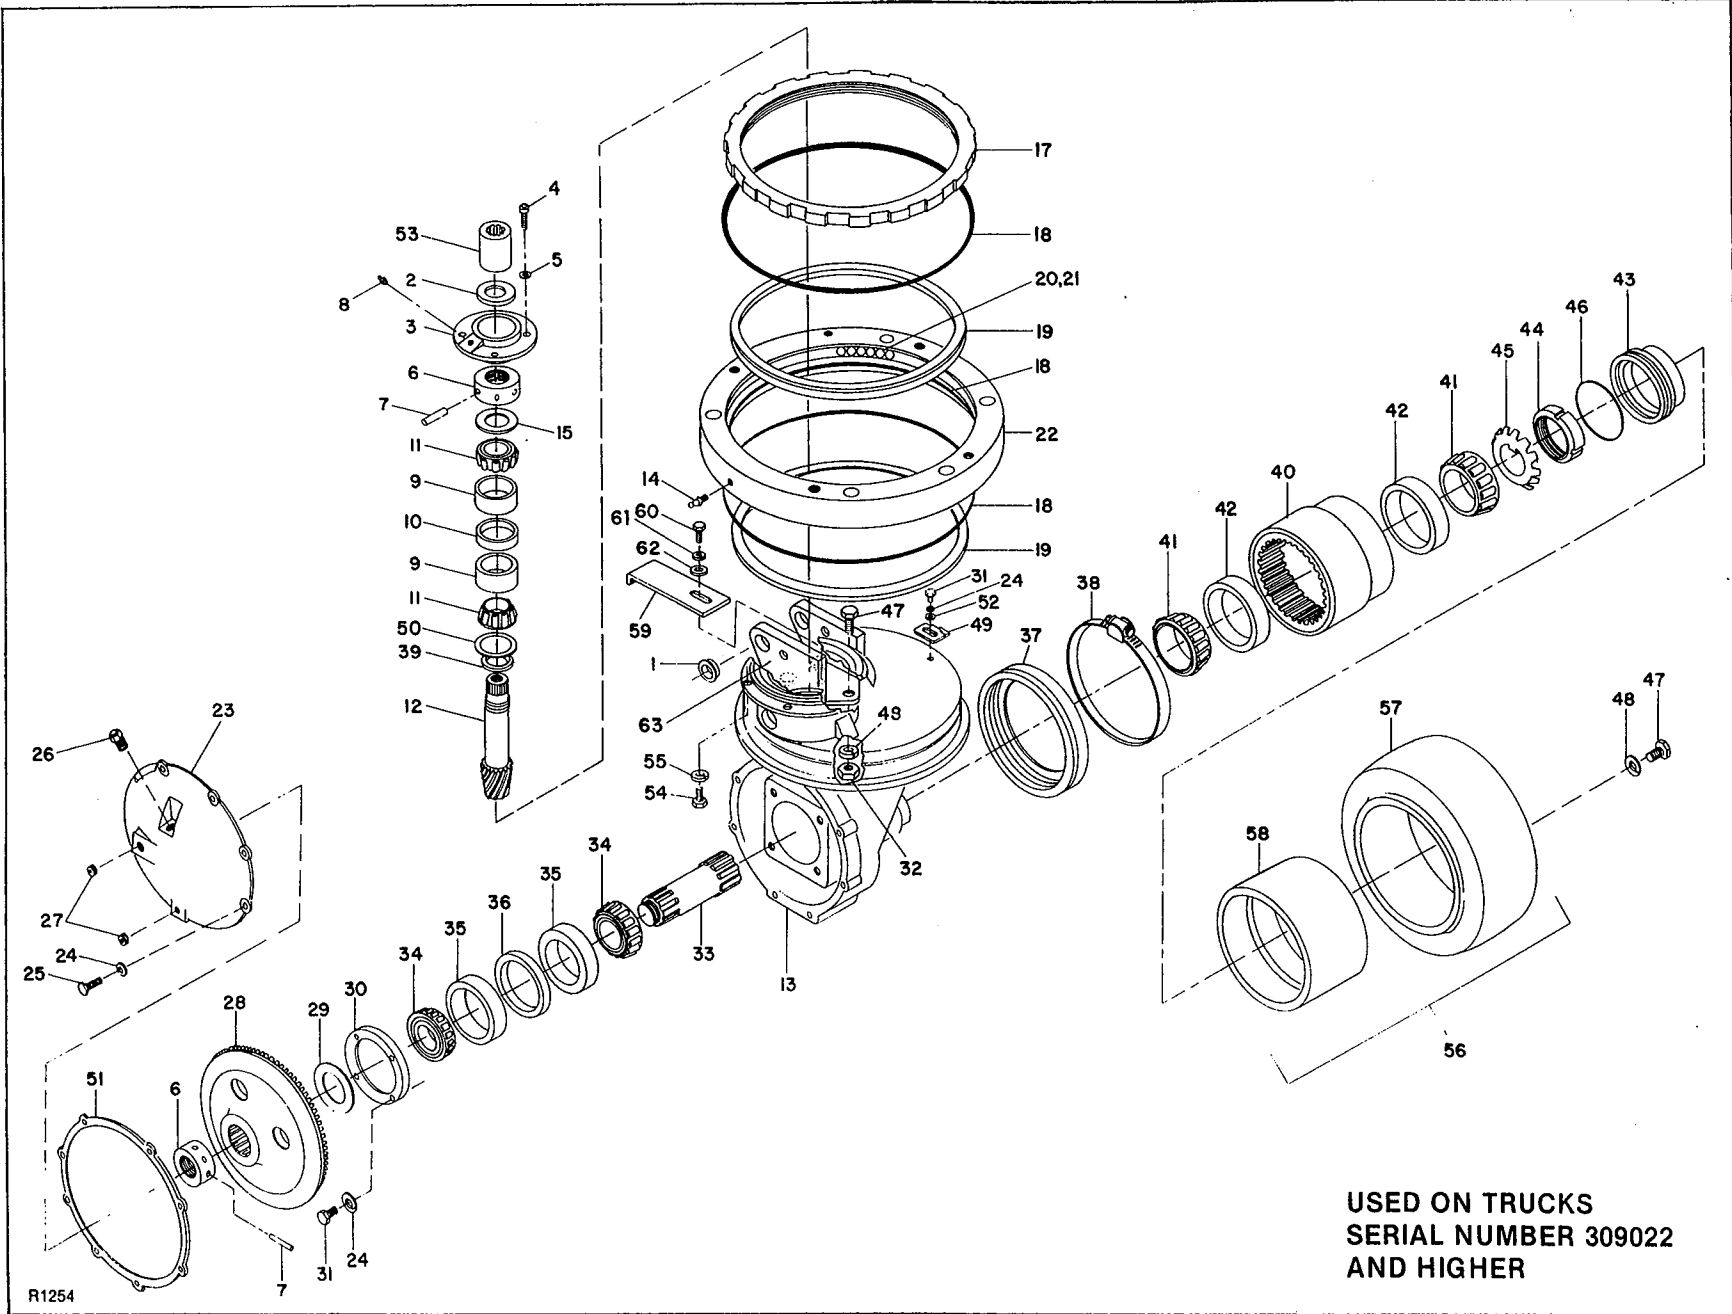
Transmission and Drive Wheel (Sheet 1 of 2)
